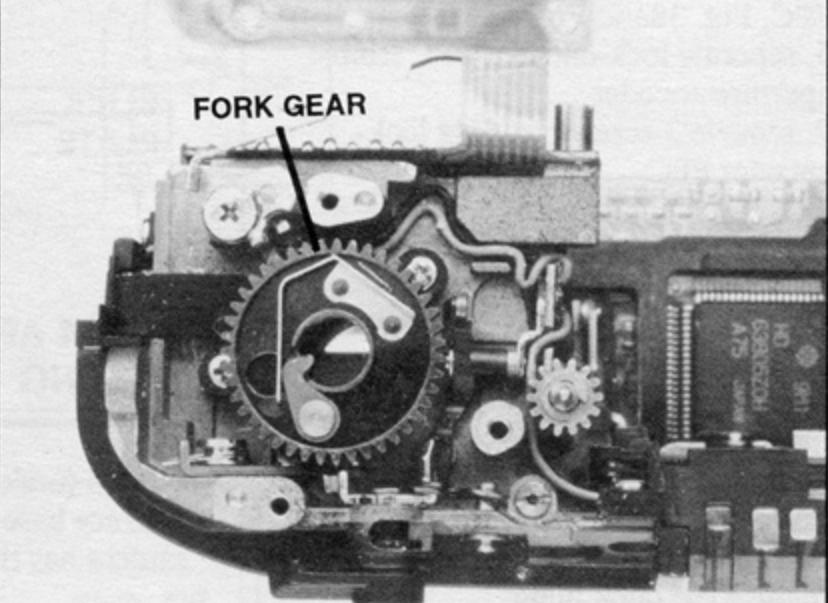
TOP VIEW, REWIND BASE PLATE REMOVED
